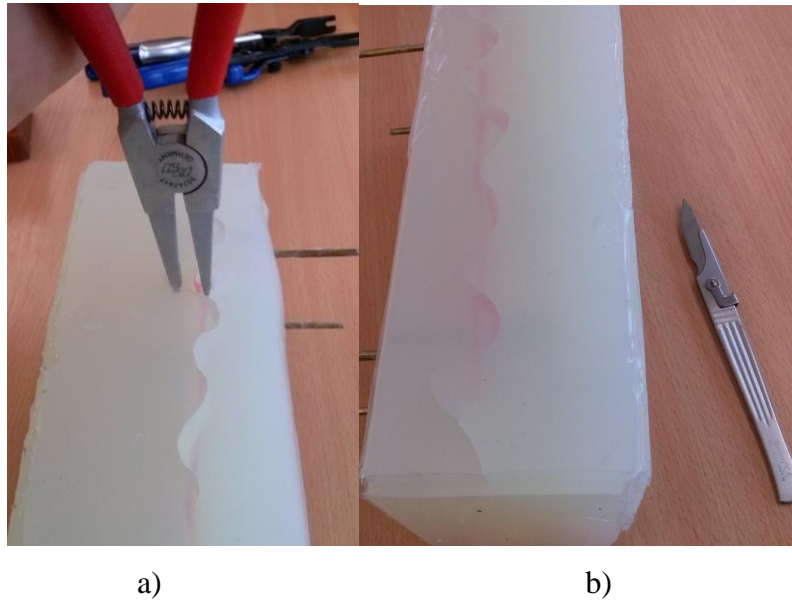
Splitting mold: a) – Special tweezer; b) – knife
